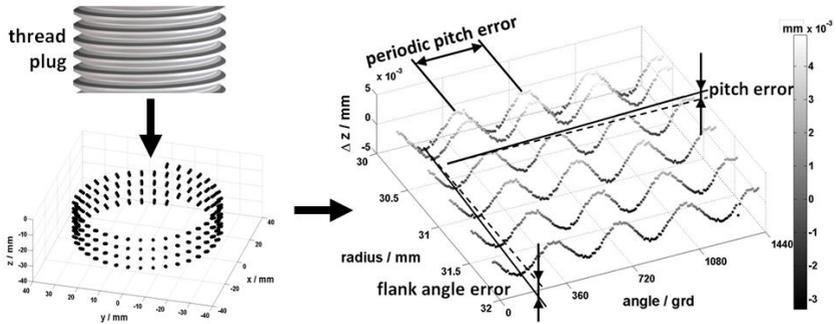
Laminar evaluation of threads using the example of a plug thread gauge of the size M64 x 6
